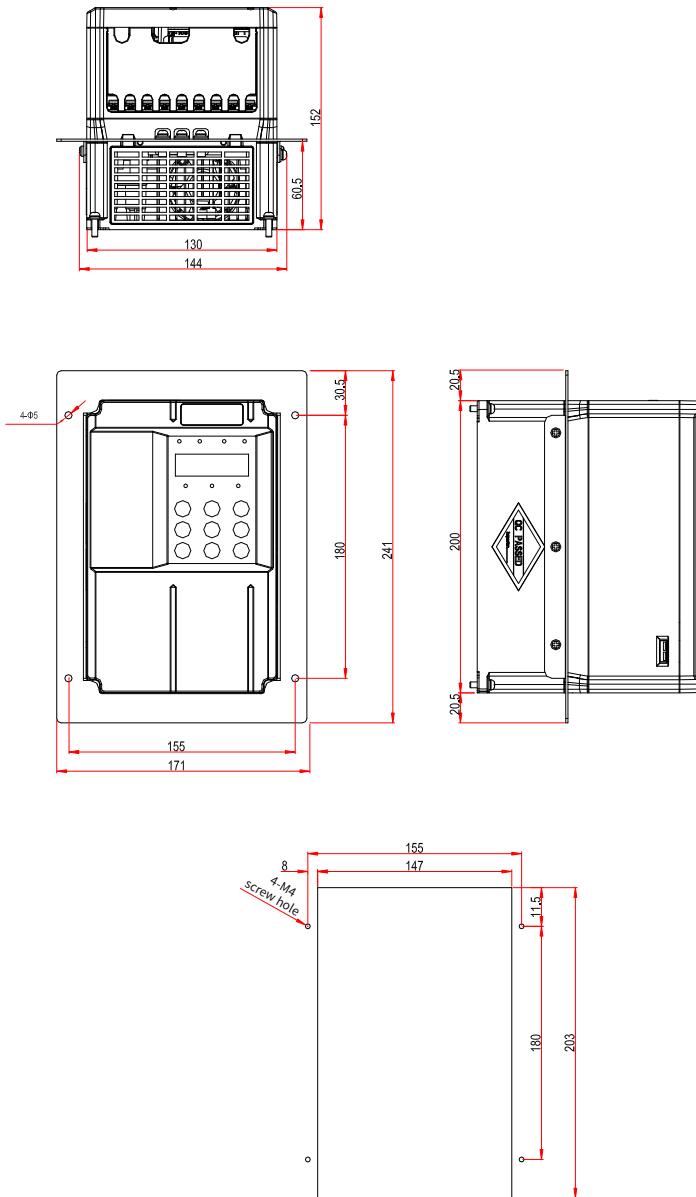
Through-hole mounting bracket and mounting hole dimensions for 0.4–3.0 kW AC drive models (mm)
